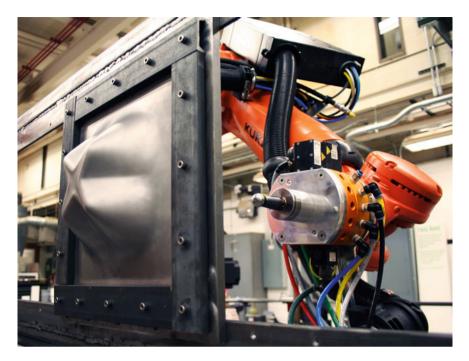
Incremental Sheet Metal Forming, Robot fabrication (Courtesy of Amar Kalo)
